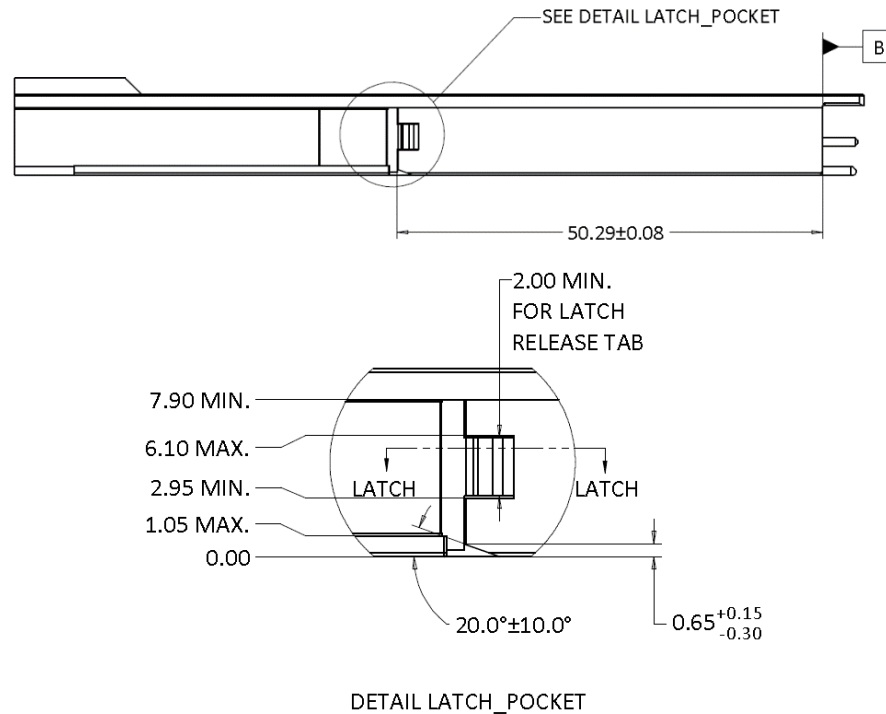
Latch pocket details of an OSFP-RHS (See section 3.7 for latch cross-section)
